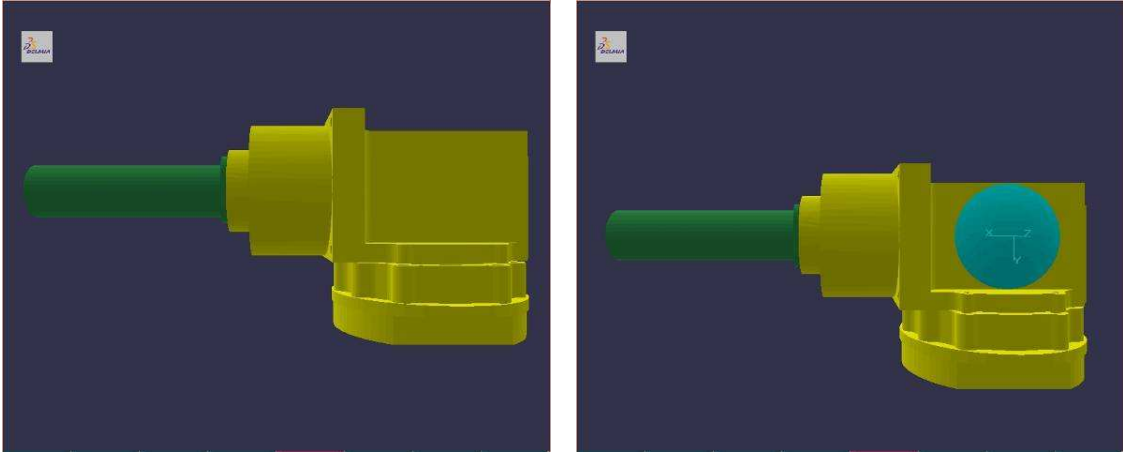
View of Beagle 2 wrist motor housing before and after RIM mounted.
